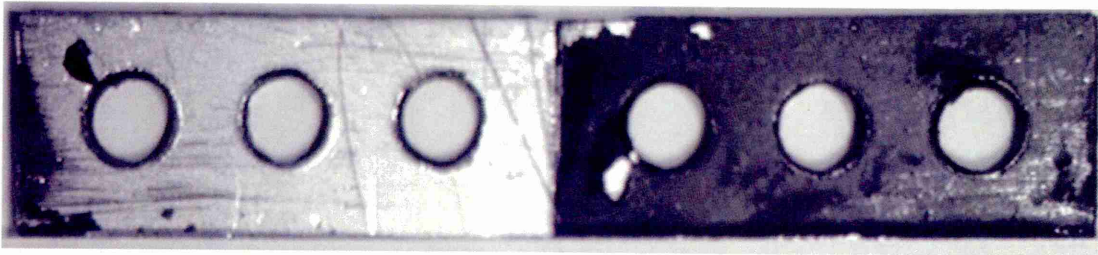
Alkaline degreased fracture surface after environmental exposure
